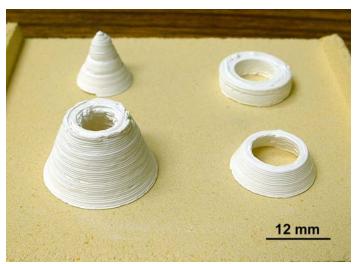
Hollow cones and cylinder (after sintering) fabricated with the extrusion force controller.
